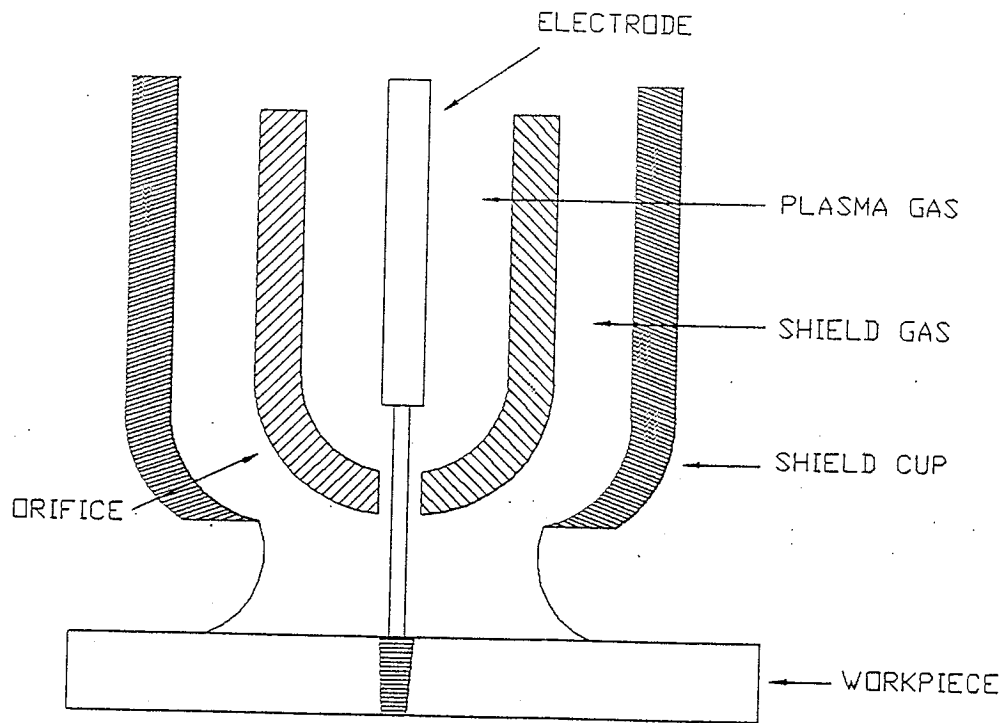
Schematic of Welding Torch in VPPA Welding
